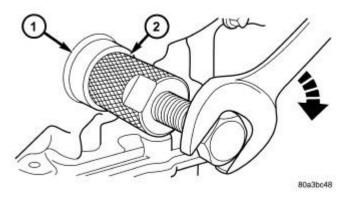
CRANKSHAFT FRONT SEAL REMOVAL Courtesy of CHRYSLER LLC
